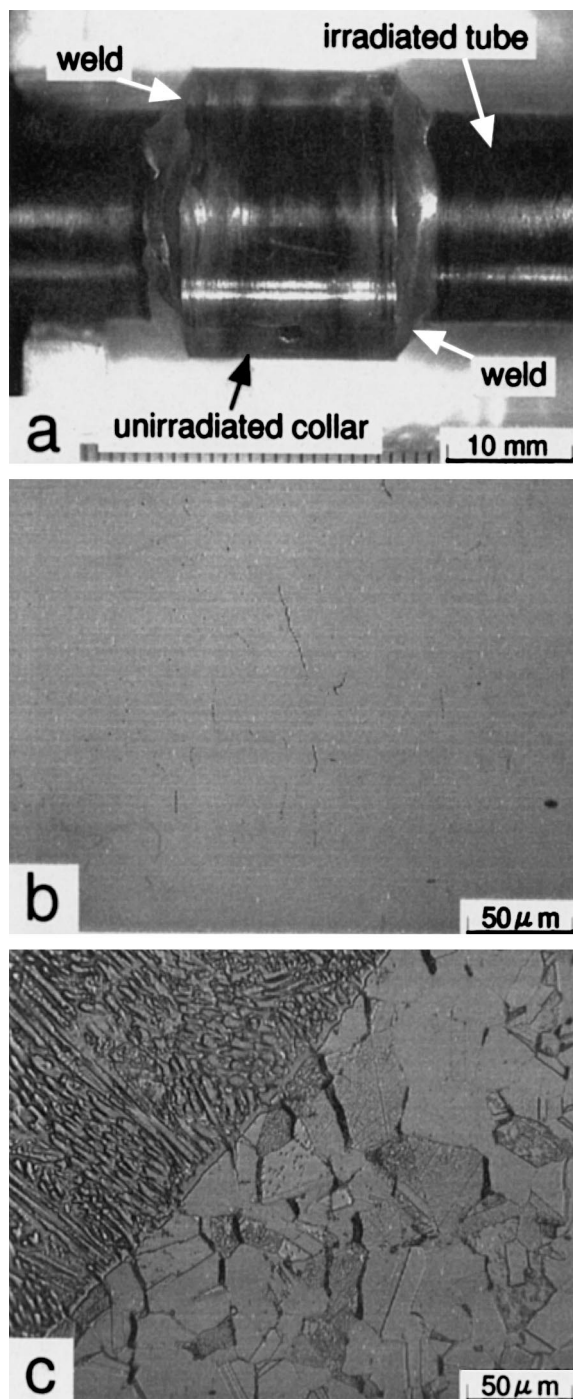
(a) The appearance of welded B2 sample with 1.9 appmHe. The cross-section of weld B1b containing 0.36 appmHe (b) before and (c) after etching indicated the formation of aligned bubbles on grain boundaries.
